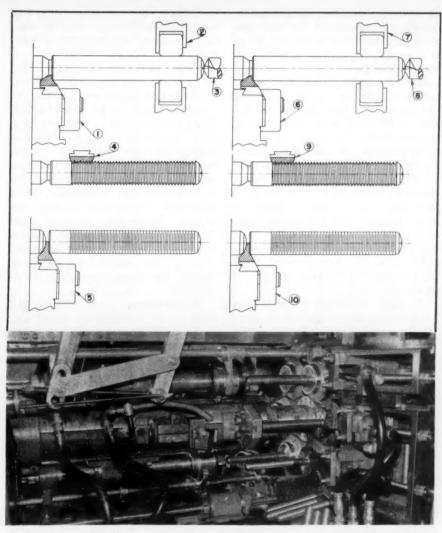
Spindle and tooling setup for 50-h.p., 1%-in., 6-spindle Cone automatic for producing two 7¾-in. leveling screws simultaneously every 7 seconds. Cross hatching on sketches indicates Carboloy grade 370 carbide tipped tools at the six spindle positions; 1 indicates chamber; 2, three-roll support; 3, spot drill; 4, threading attachment; 5, form cutoff and feedout; 6, chamfer; 7, three-roll support; 8, spot drill; 9, threading attachment; 10, form cutoff and feedout. Workpieces are produced from 1-inch SAE B1112 steel stock.
